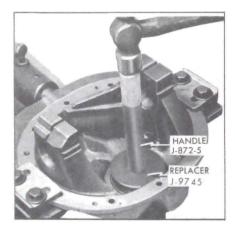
Installing Rear Pinion Bearing Outer Race
